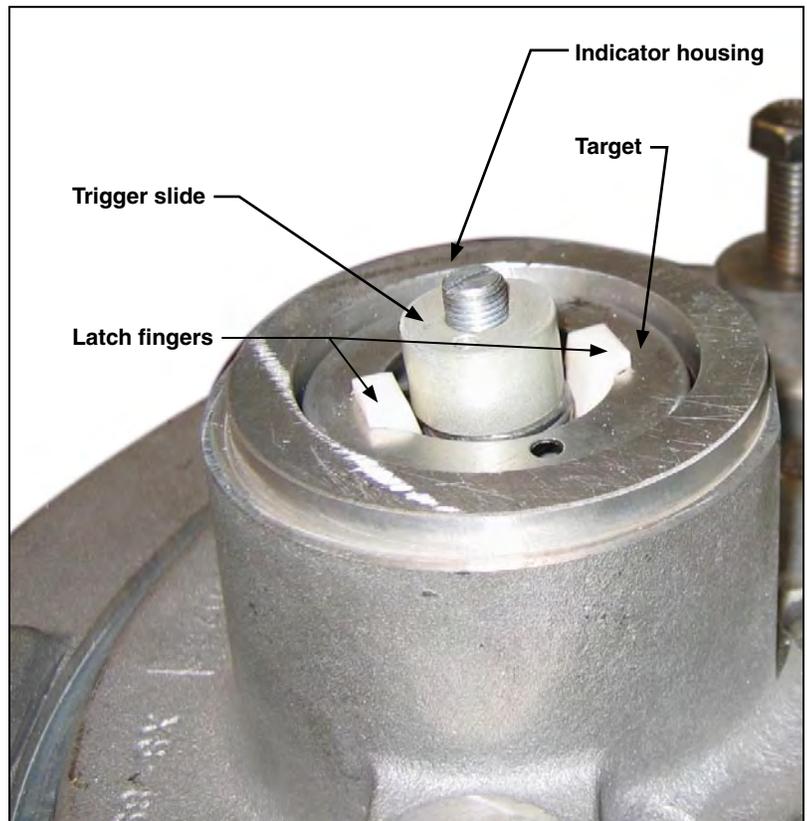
Indicator assembly with broken spring carrier. The trigger slide has been pushed above the surface of the indicator housing by the bellows spring.
